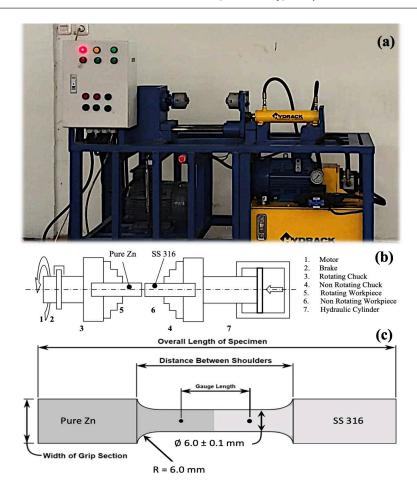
(a) Continuous drive friction welding machine, (b) schematic diagram for friction welding (c) the geometric of the tensile test specimen
